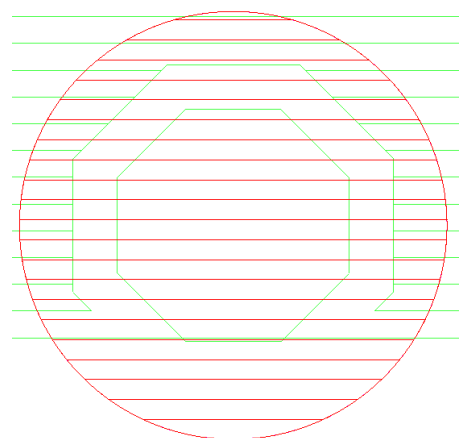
Layout of the laser path for the ablation of flip-chip bonding pads openings (red lines)
